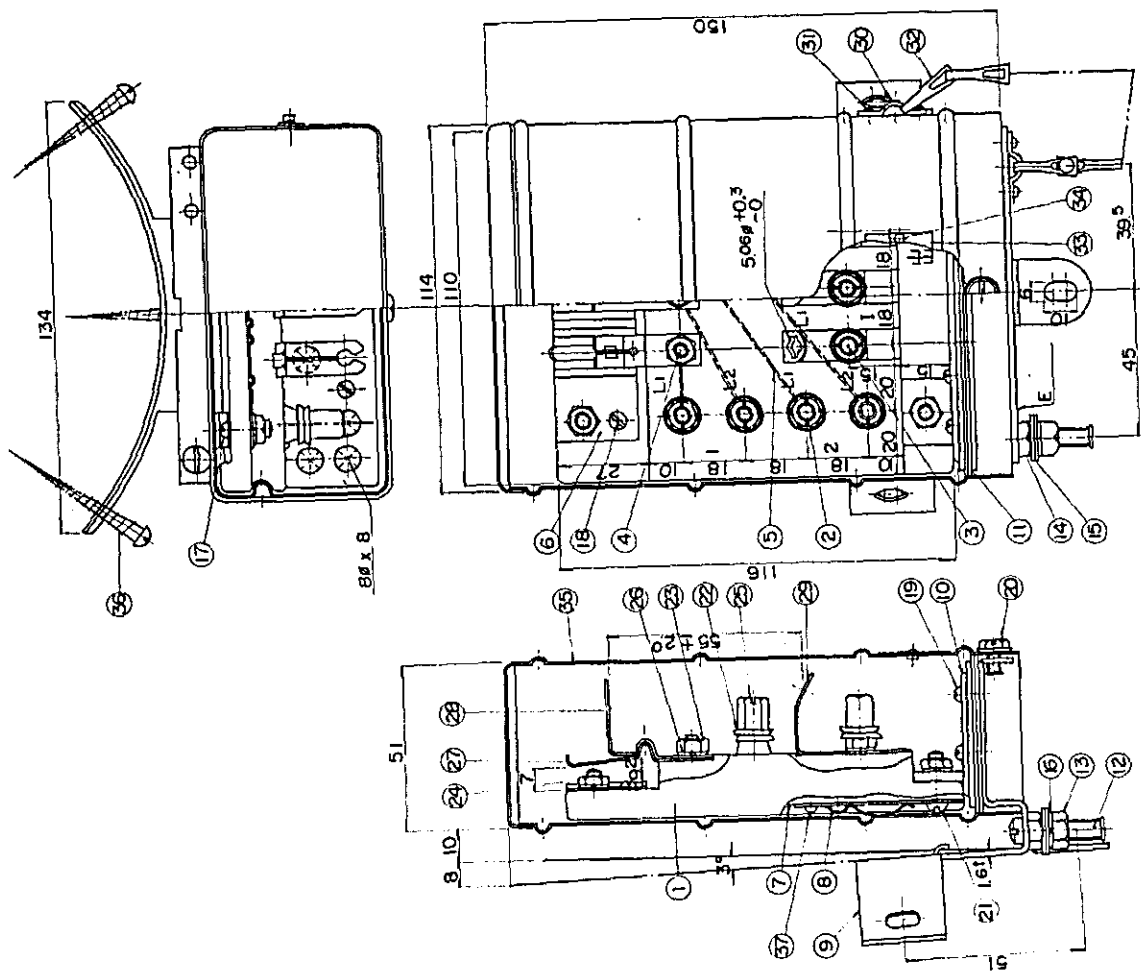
12.1 2 Pair Pole Mounted Protector
